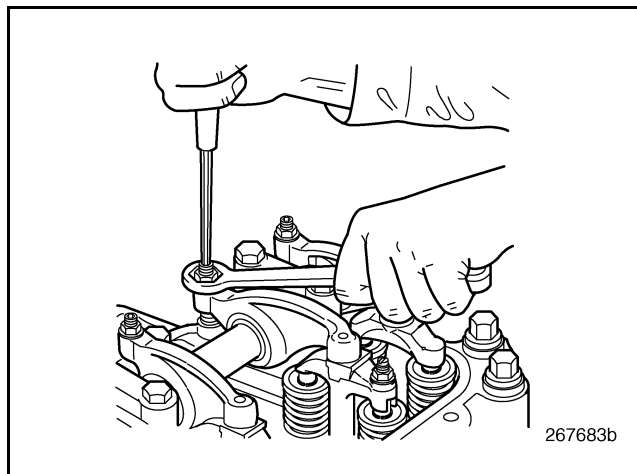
Loosening Exhaust Rocker Arm Locknut and Backing Out Adjusting Screw
